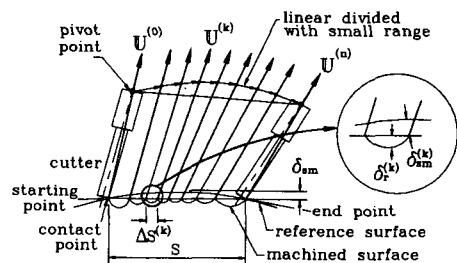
Linearization for 5-axis machining of the sculptured surface
